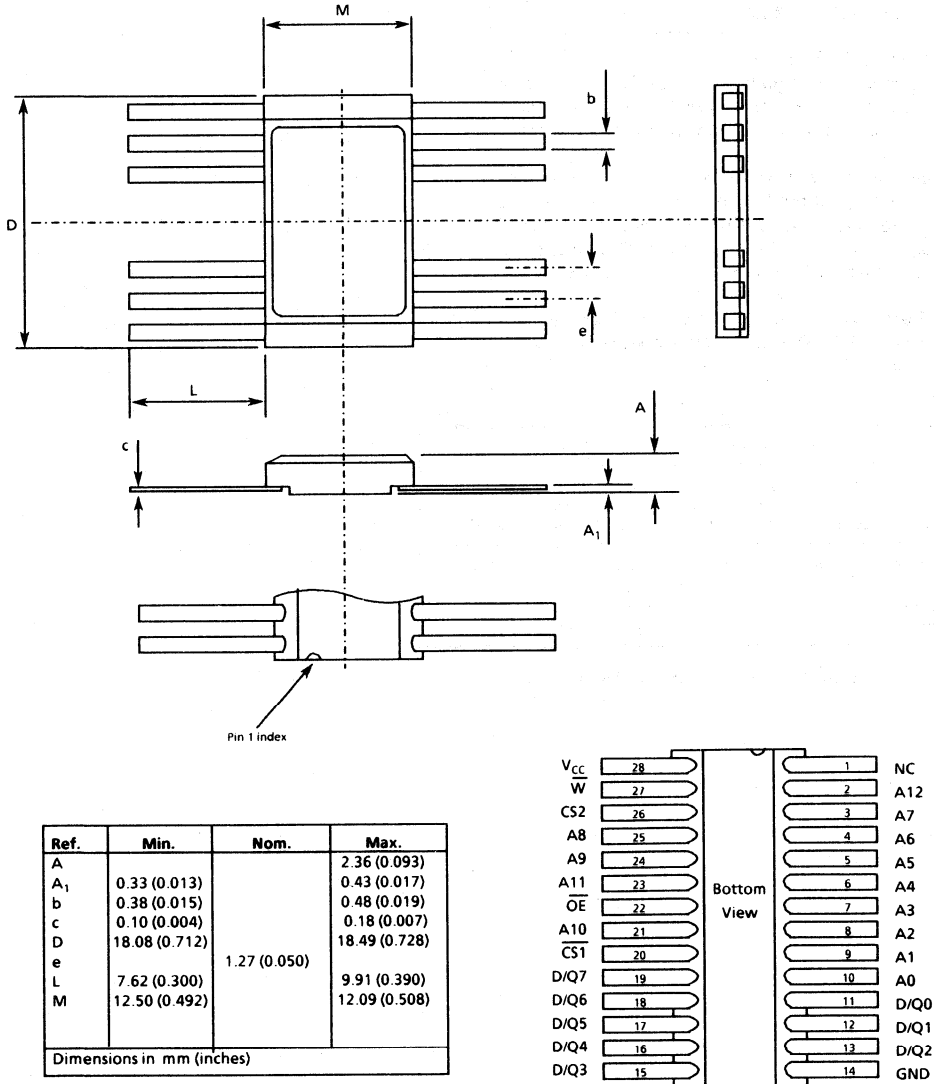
28-lead Ceramic Flatpack (solder seal) - Package style F
